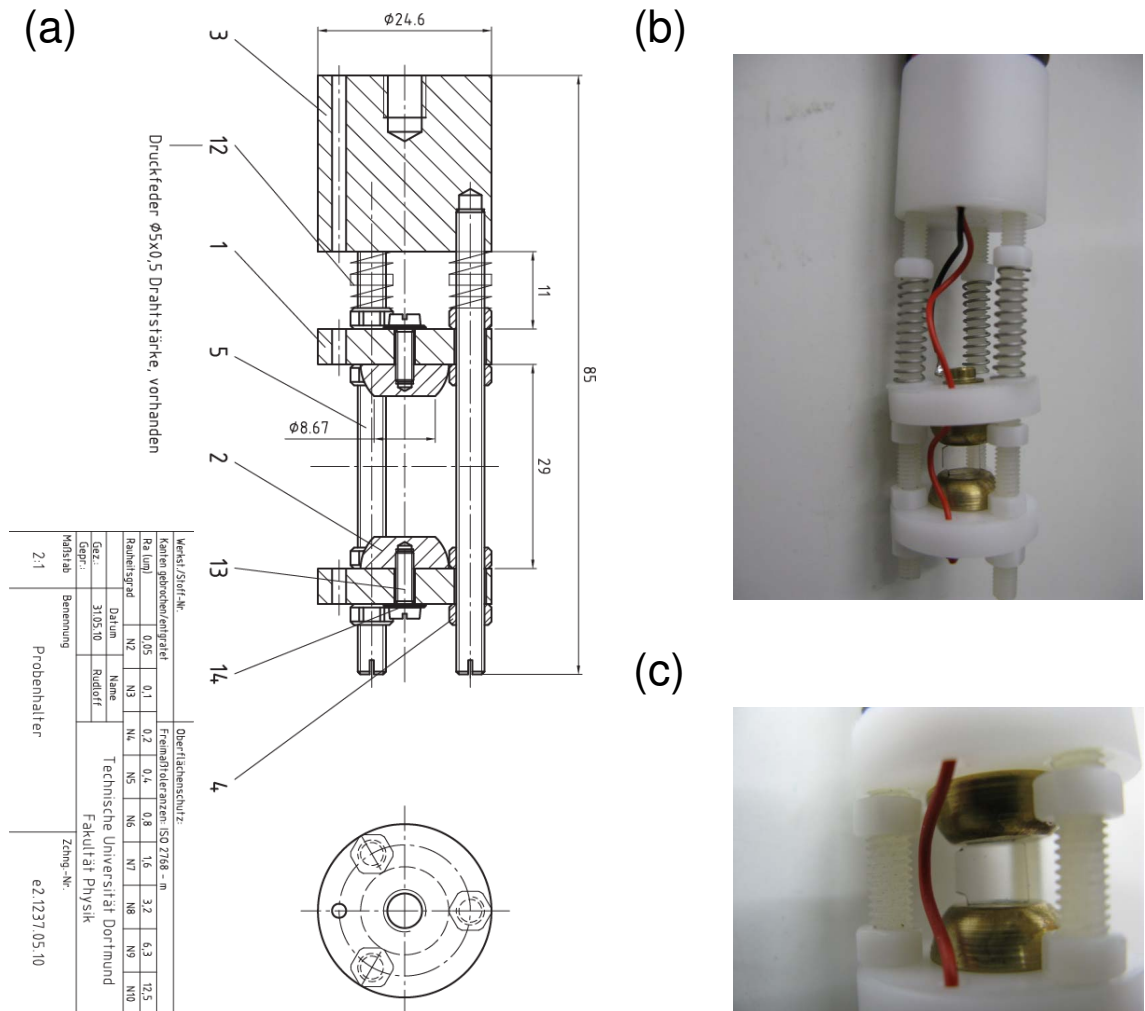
(a) Technical drawing of the custom sample holder designed for the application of electric fields. (b,c) Photographs showing a ZnO sample mounted inside the custom sample holder.
